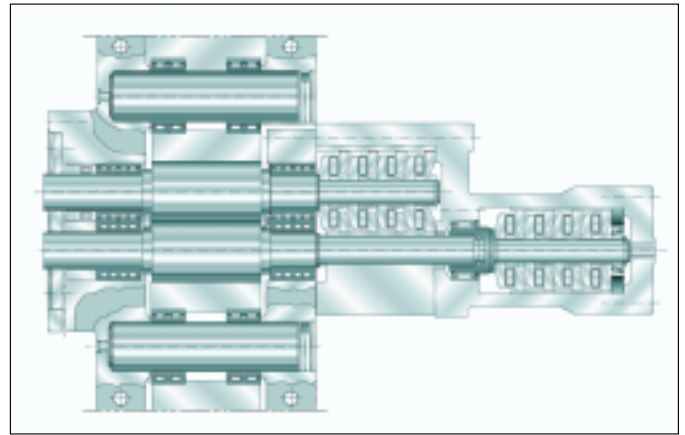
Distribution gear in a twin screw extruder with combination bearing consisting of two identical tandem bearings
